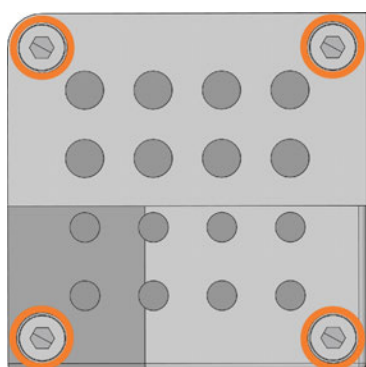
THE 4 SCREWS ON THE BOTTOM SIDE OF THE TOOL MAGAZINE (MARKED ORANGE)
